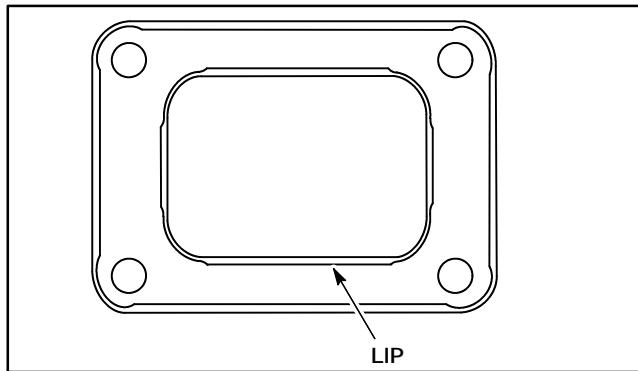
Turbocharger Exhaust Inlet Gasket
